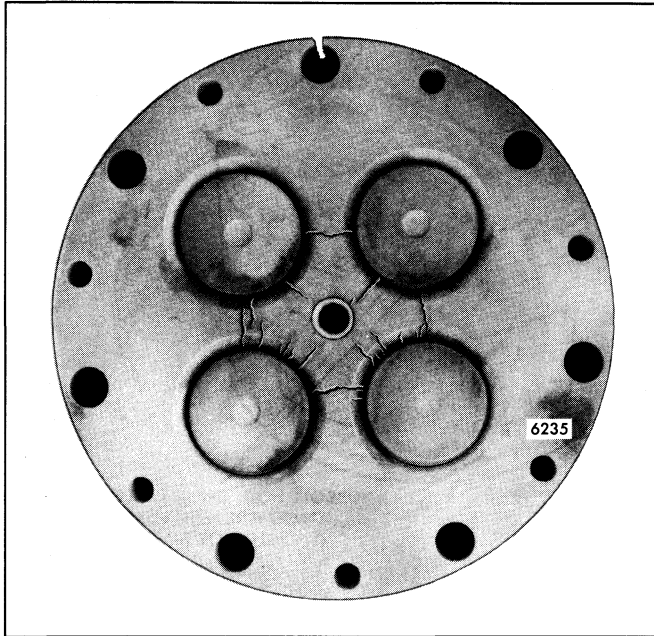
Valve-to-Valve or Valve-to-Injector Tube Hole Cracks (Head Not Usable)
